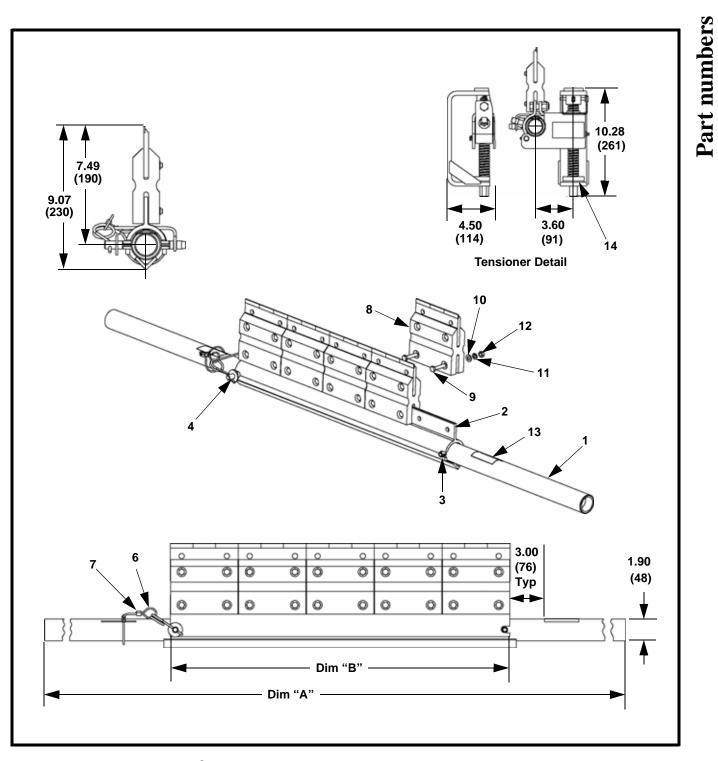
MARTIN[®] SQC2TM Belt Cleaner Assembly, P/N SQC2-XXXXXXXXXXXX
